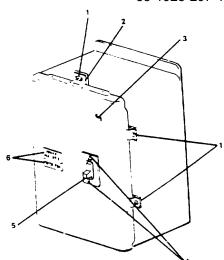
Motor Controller (Weld Hood Exhaust Fan).
